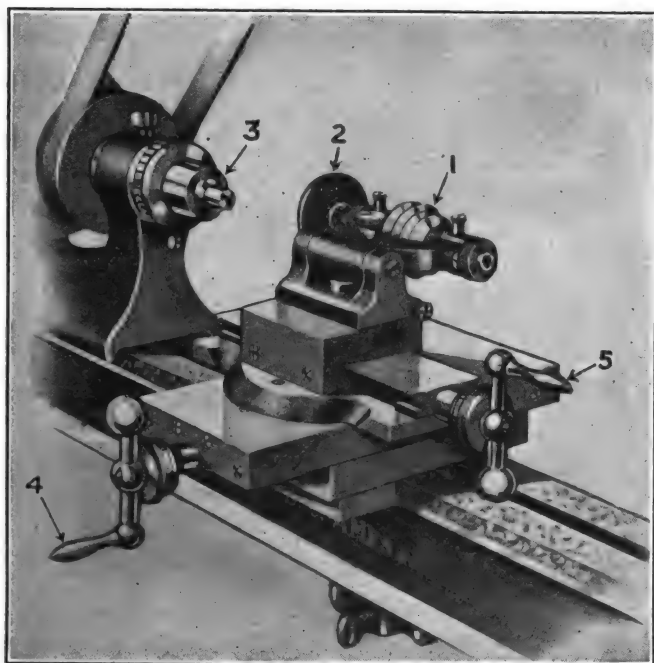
A grinding spindle attached to the slide-rest of a precision bench lathe.
